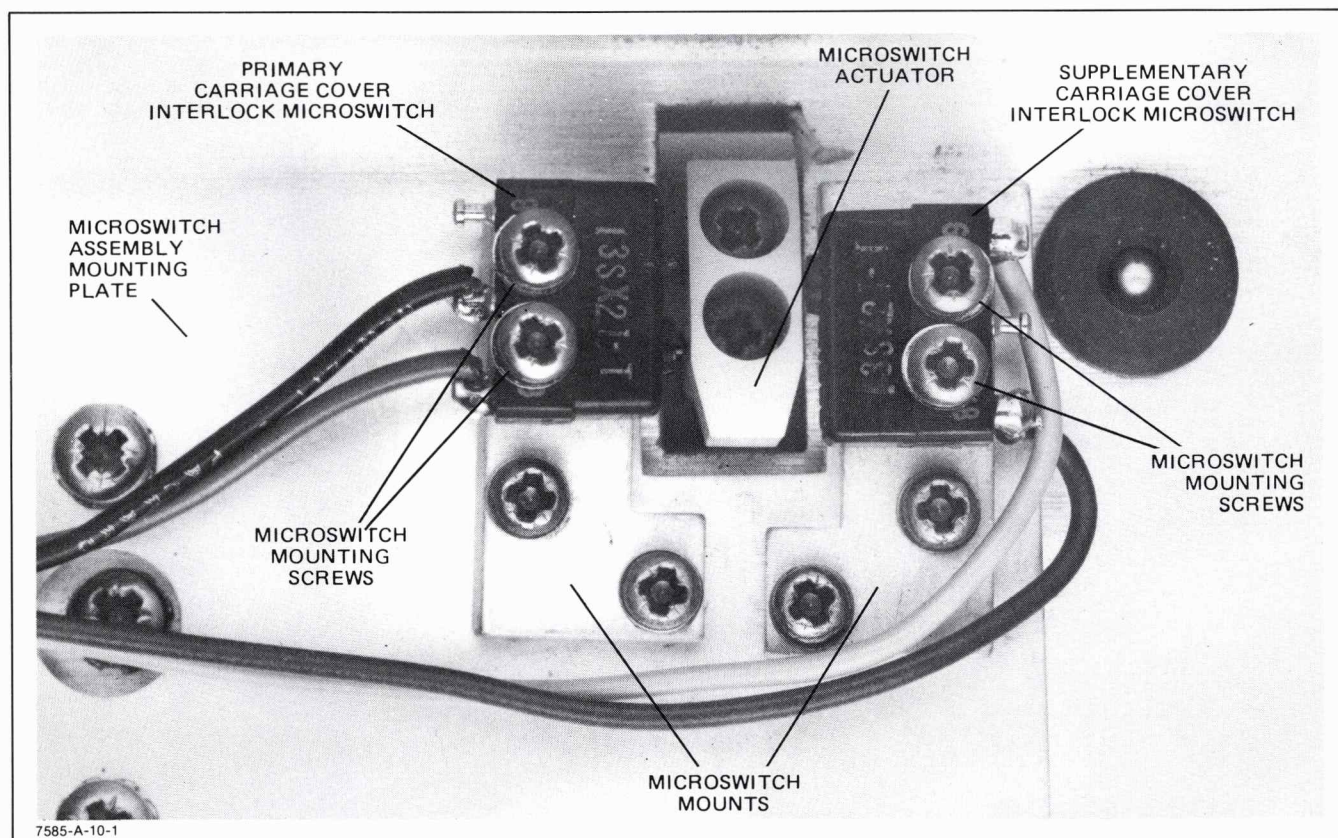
Carriage Cover Interlock Microswitches Adjustment
